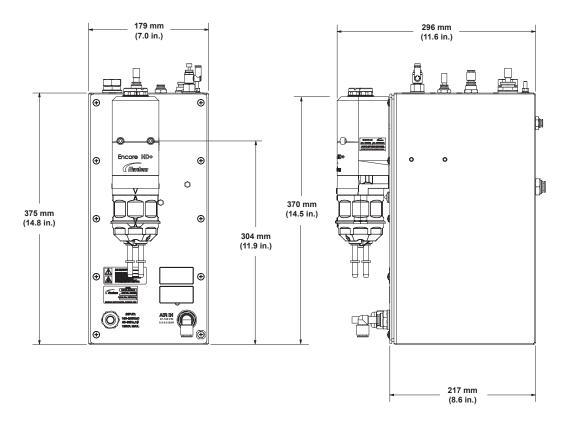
Encore HD+, XD Controller Power Unit Dimensions
